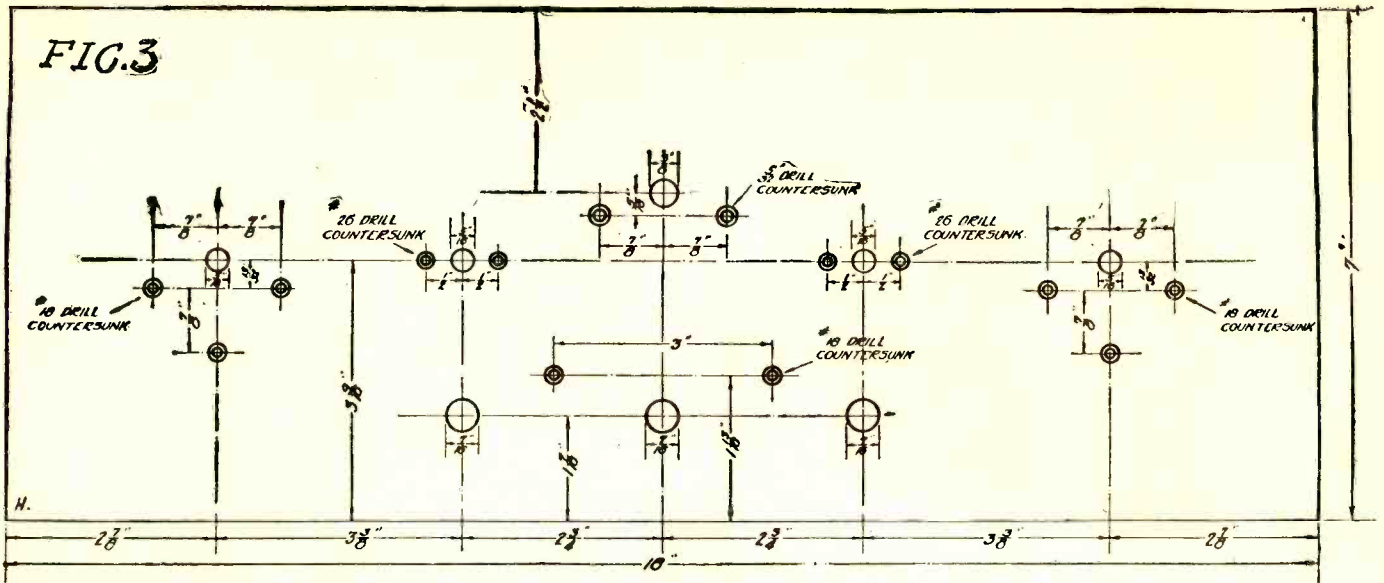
The panel layout, giving dimensions for drilling holes.
